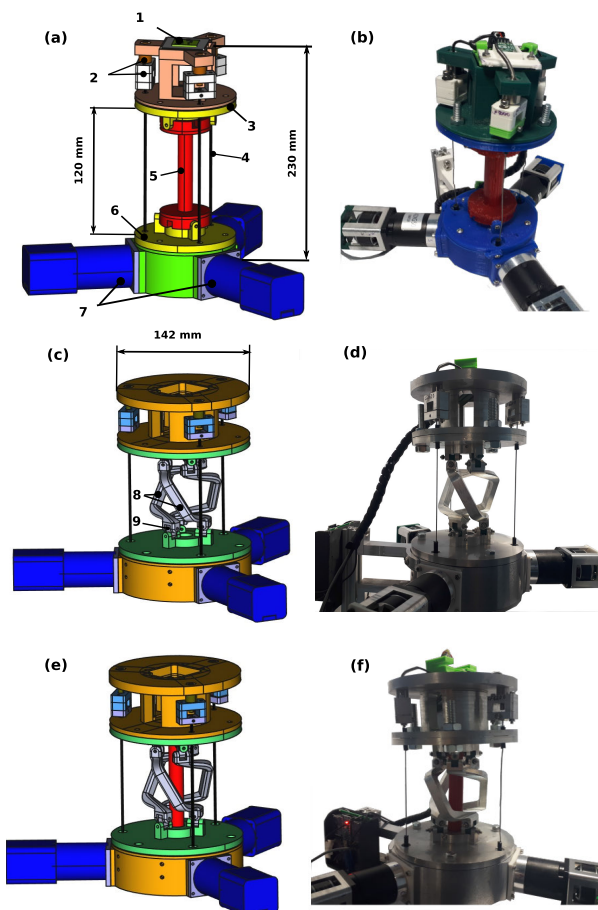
Assembled structures of the shoulder joint. a) CAD design of 1-F structure; b) Realistic view of 1-F structure; c) CAD model of 3-RRRR structure; d) Real prototype of 3-RRRR; e) CAD version of 3-RRRR-1-F prototype; f) Physically assembled 3-RRRR-1-F prototype. 1-Inertial measurement unit (Model: AltIMU-10 v5); 2-Force sensor with a holder; 3 - Platform part; 4 - Tendon line; 5 - TPU based elastic central limb; 6- Base part; 7-Assembled servomotors; 8-rigid limbs; 9-Universal joint.
